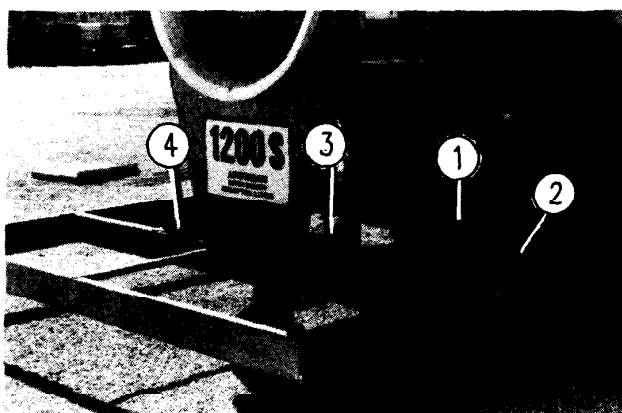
CONNECTING LEFT-HAND FLOOR SUPPORT ANGLES AND ACCESS DOOR REAR FRAME.
